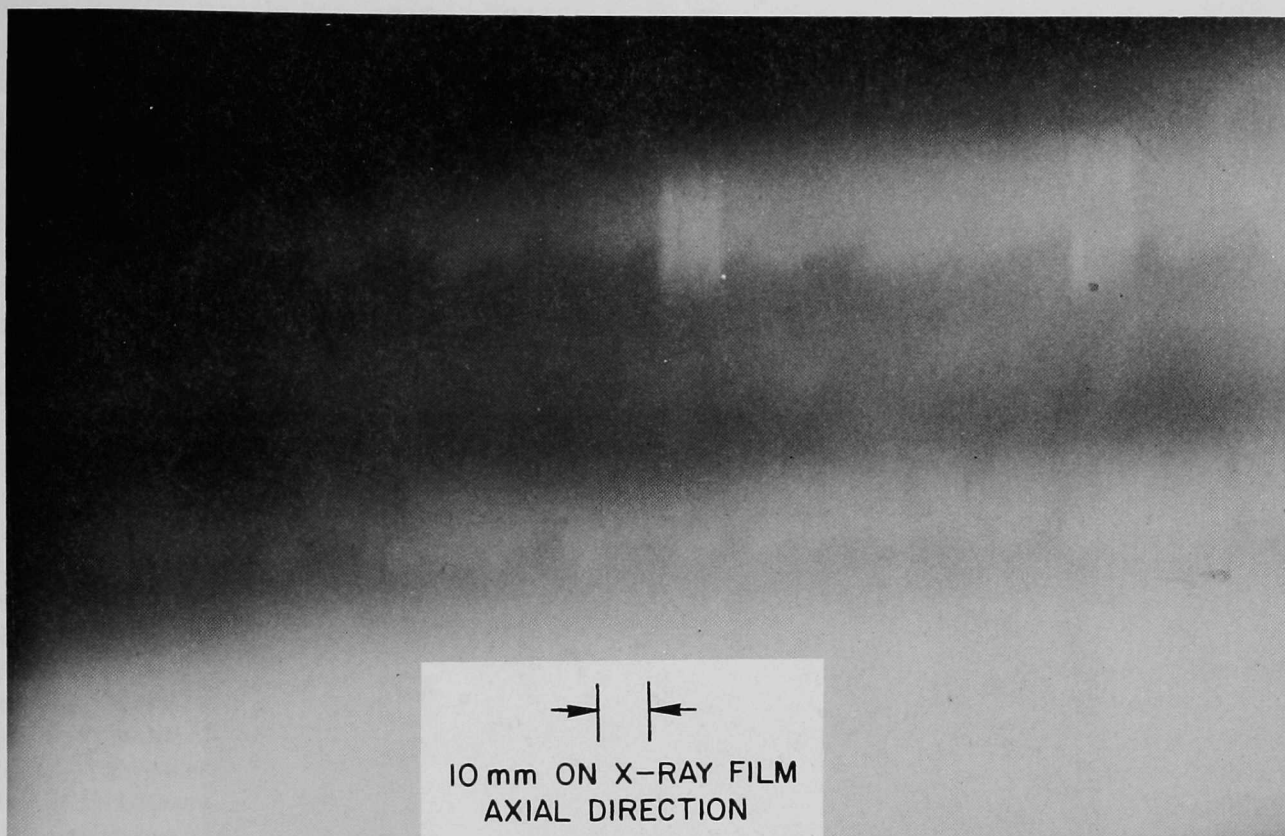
Erosion Pattern of Longitudinal Sawtooth Ridges in 0.51-m-long Cone of Type 316 Stainless Steel Within Body of HYGAS Cyclone Separator. X-ray view exposed through the entire assembly. Neg. No. ANL-306-78-463
